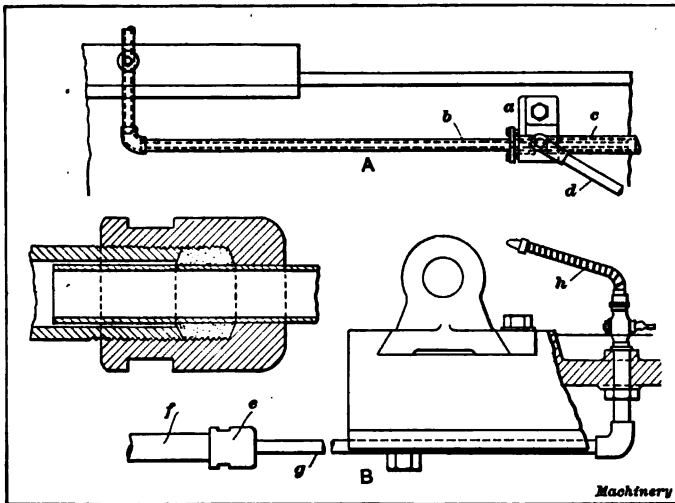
A. Sliding Pipe and Stuffing-box of Turret Lathe. B. Telescopic Pipe Connection for Carriage of Gear-cutting Machine
